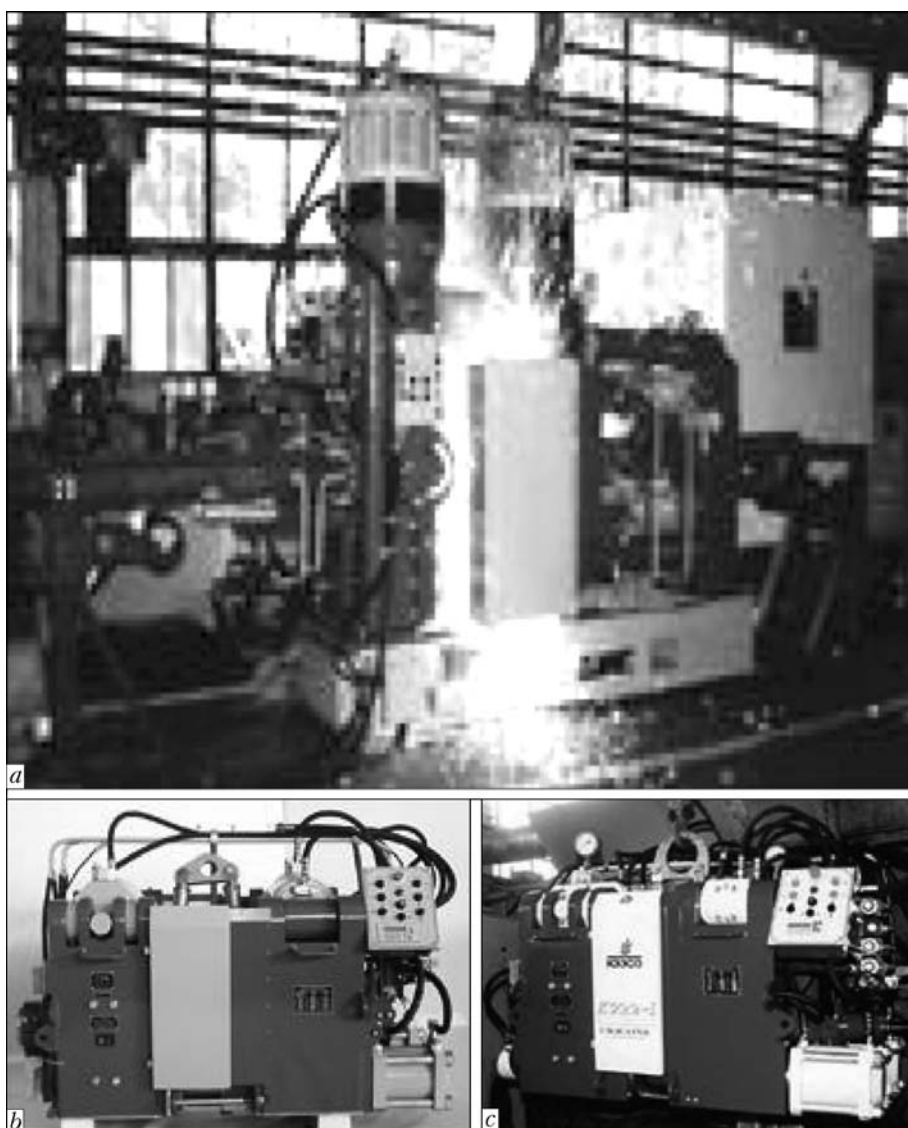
New generation of rail welding machines: *a* — stationary machine K1000; *b, c* — mobile machines K920 and K922
